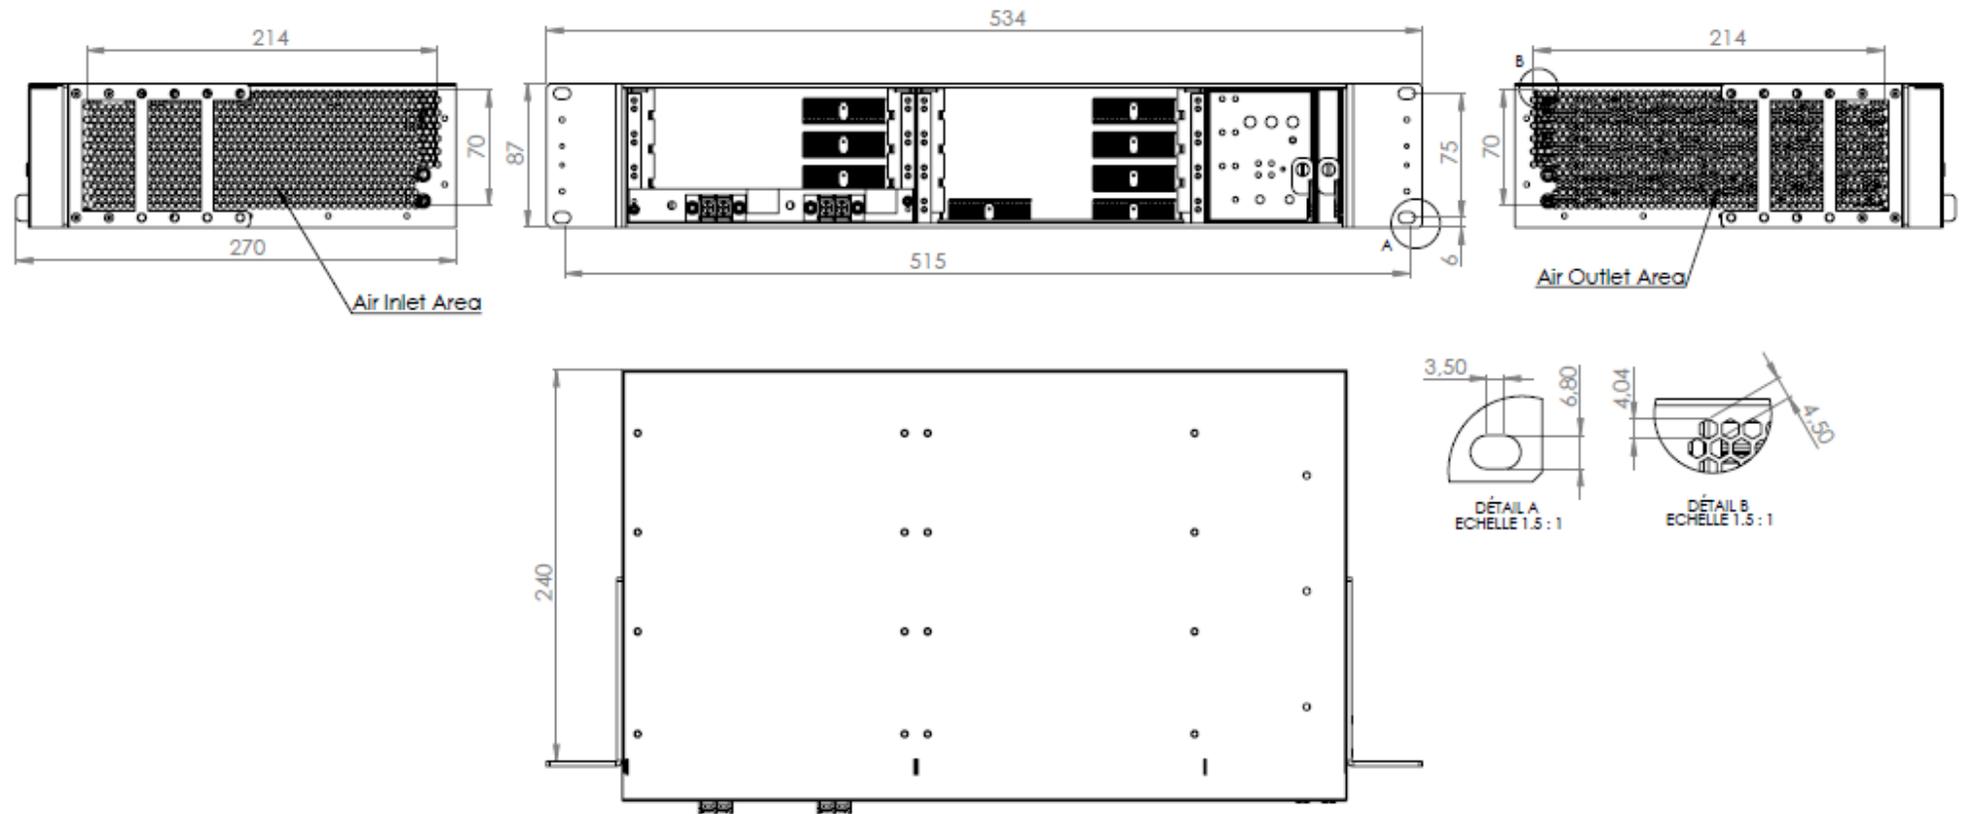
DC Chassis mechanical dimension (ETSI flange)
